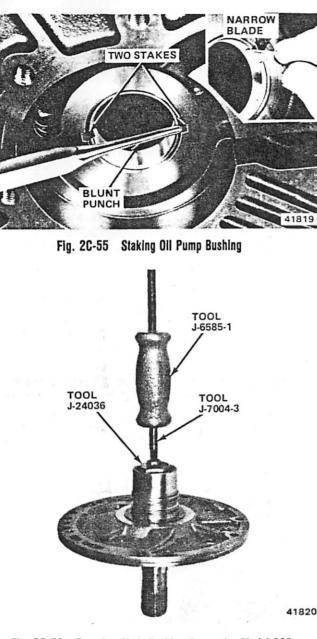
C-56 Reaction Shaft Bushing Removal—Model 999
